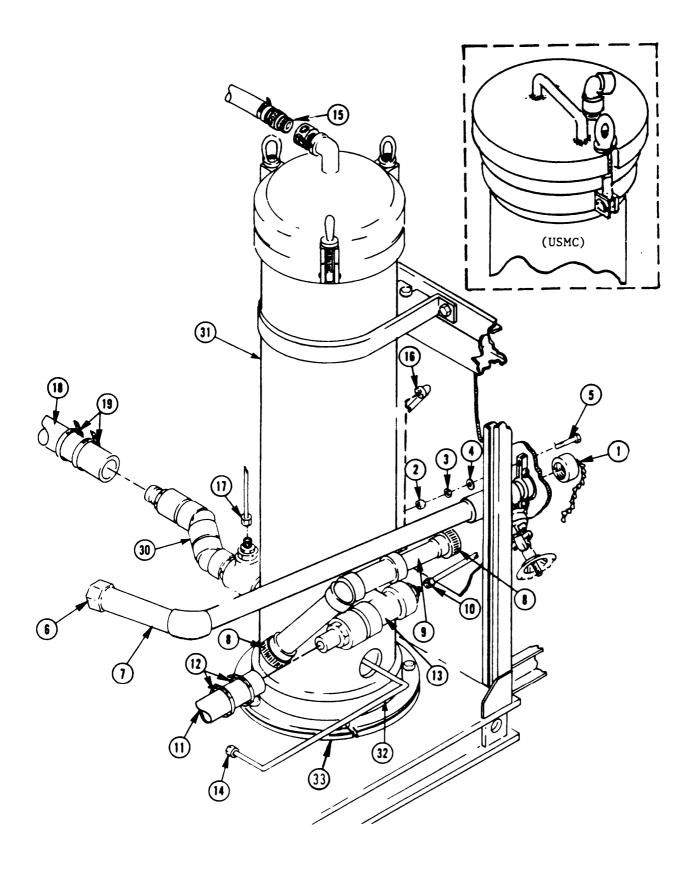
Cartridge Filter Assembly (Typical) (Sheet 1 of 2)
